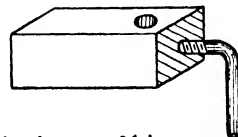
The heavily shaded part is metal that has to be cut away by the tap used for forming a female thread
